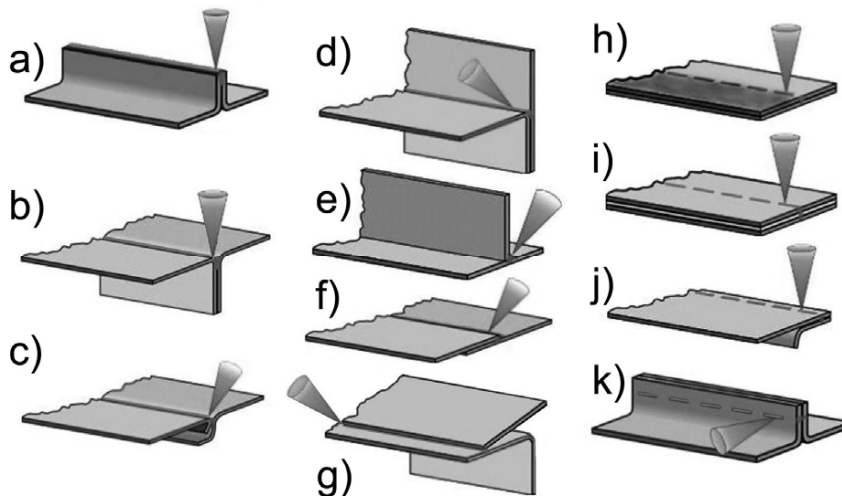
Sketch of the most utilised weld geometries in case of thin sheets
